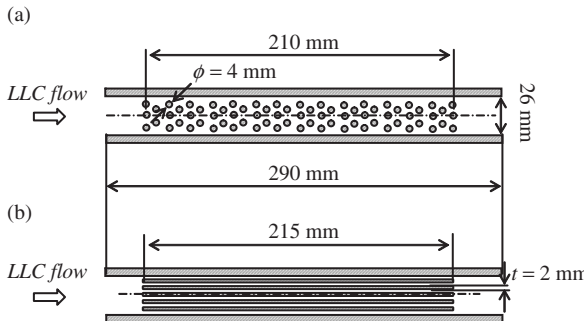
Finned channel heat sinks: (a) pin-finned channel heat sink; (b) plate-finned channel heat sink.
